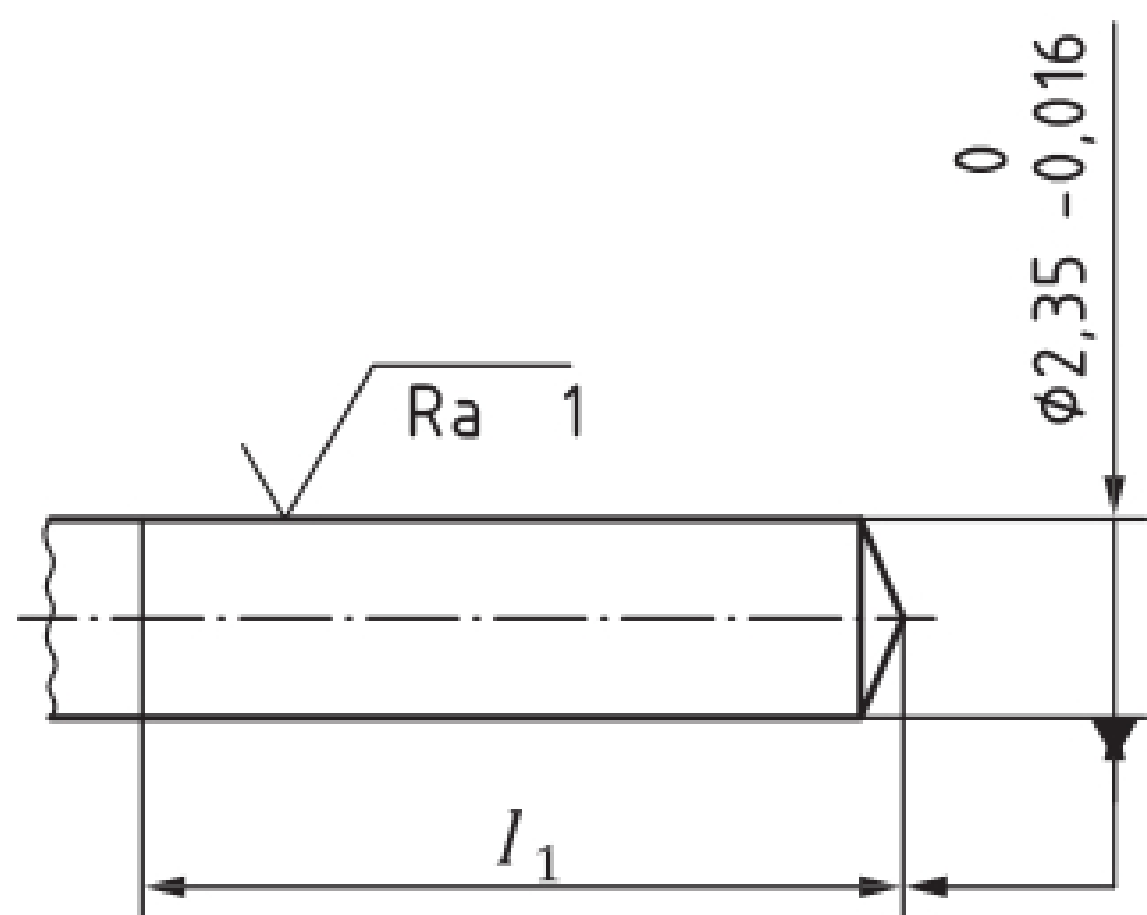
Dimensions, tolerances and surface roughness for Type 2 shank
